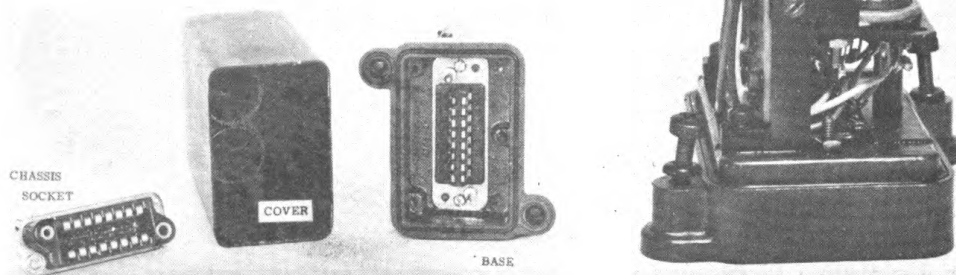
Internal construction of Minimod II. The three component parts are shown separately above. To the right is a side view of the base with parts board and circuit parts in place.
